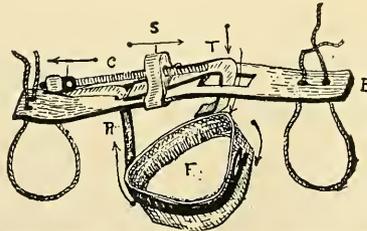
FIG. U.—The same mechanism enlarged to more clearly show its construction.²
